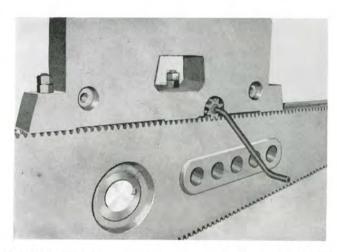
New removable pinion (with crank handle attached) is used to adjust all counterweights.
